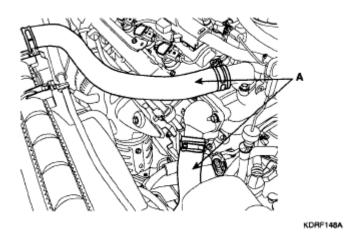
Identifying Upper And Lower Radiator Hose Courtesy of HYUNDAI MOTOR CO.
